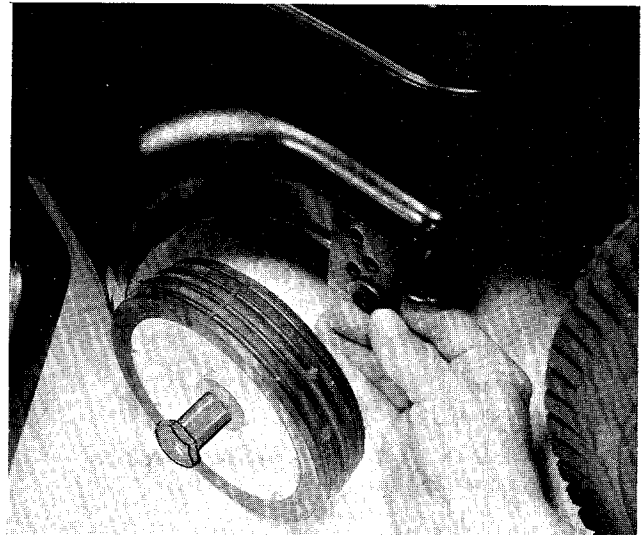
WHEEL HEIGHT ADJUSTER—25" DECK
